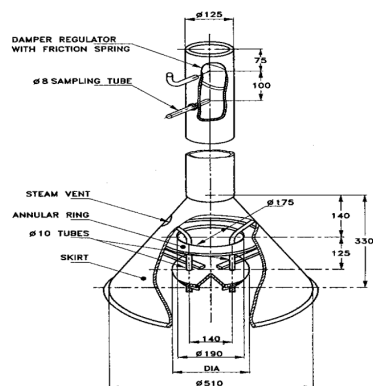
Drawing of hood for burner (Ref. from: IS 4246:2002).
